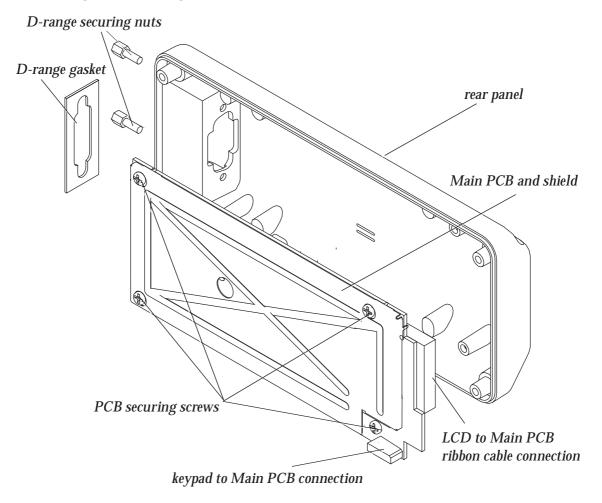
Separating the Main PCB from the Rear Panel - Internal View
